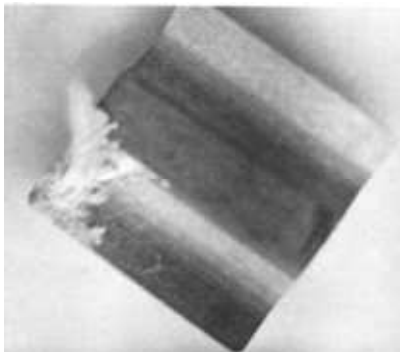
Deposition on cutting edge after cut with $v = 350\text{m/min}$
